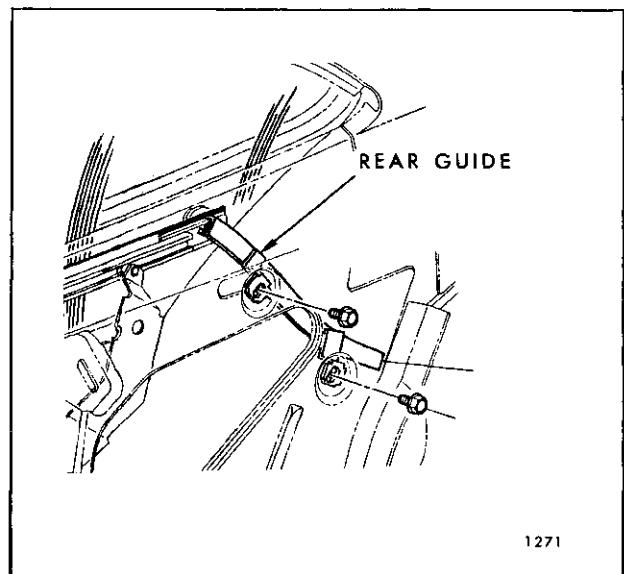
Rear Quarter Window Rear Guide Assembly –
